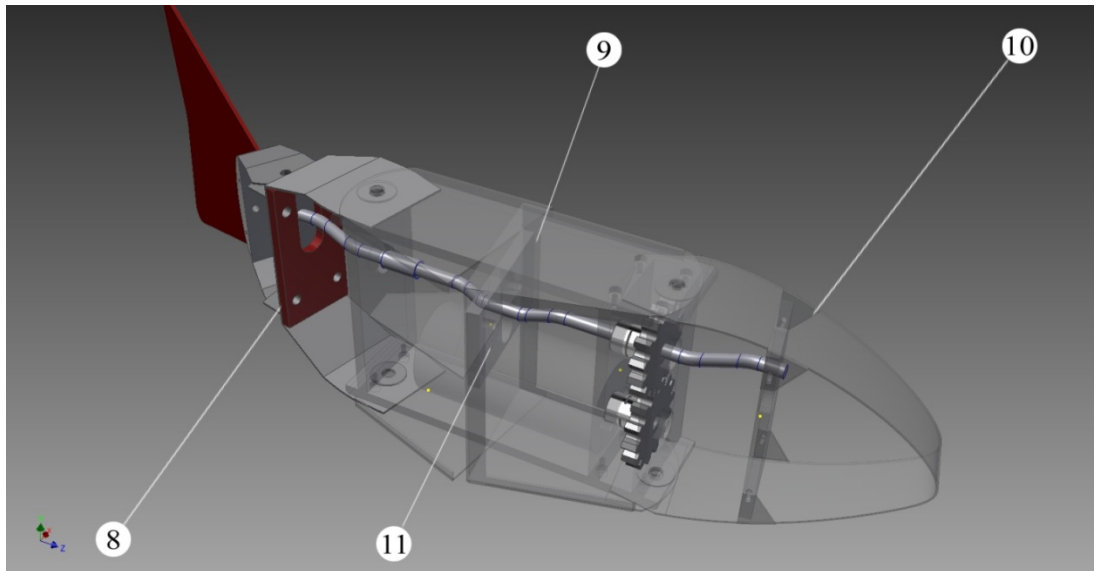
8-Final link V; 9-Outer space frames; 10-Link I drive plate; 11-Mid-body drive plate.
